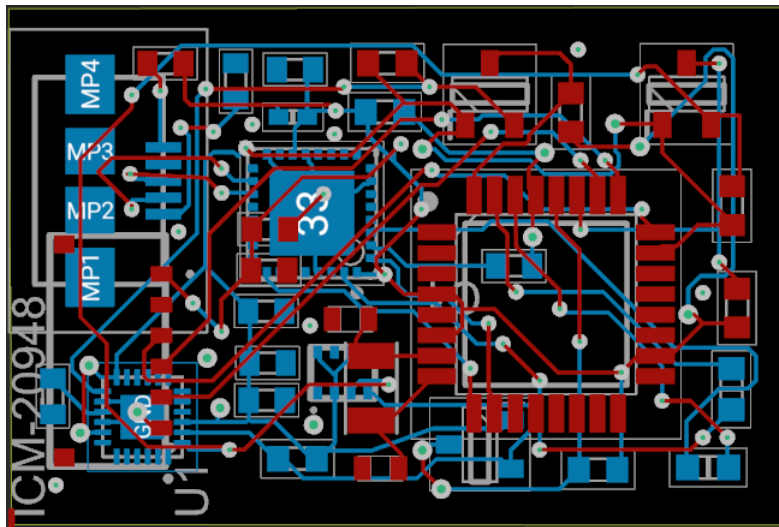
Printed Circuit Board footprint with component placement and tracing.
